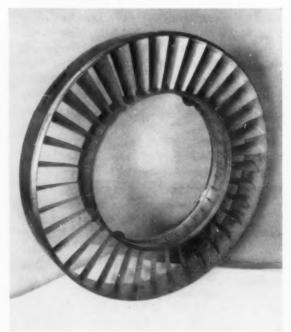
Quality control checking of turbine wheel. Blade spacing and position are being checked.
